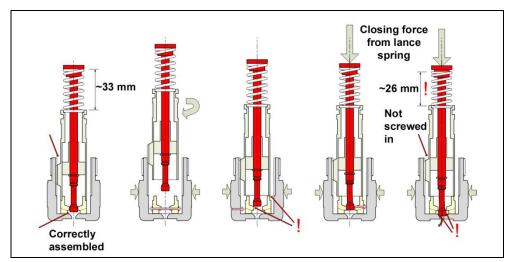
A method of nozzle assembly leading to valve stem bending and leakage
